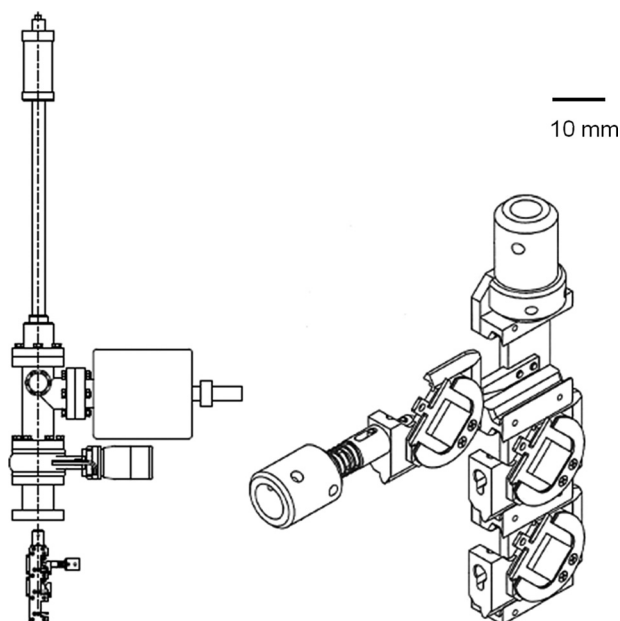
Perspective stereographic drawings of the newly designed sample plate holder with a sample on an Omicron-type plate.
